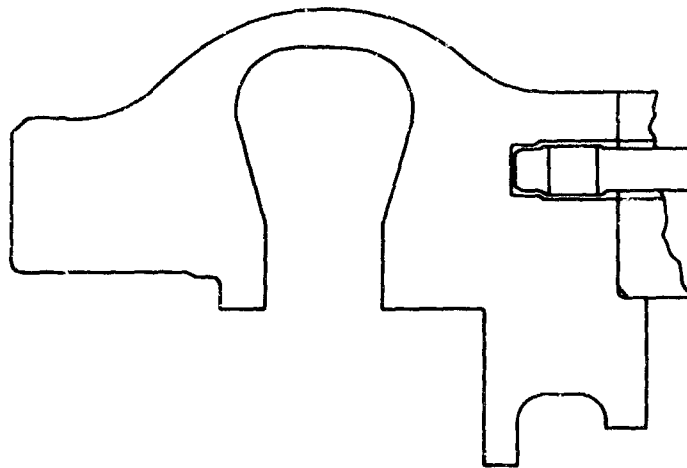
Oxidizer Turbopump Impeller Housing FD 33321
